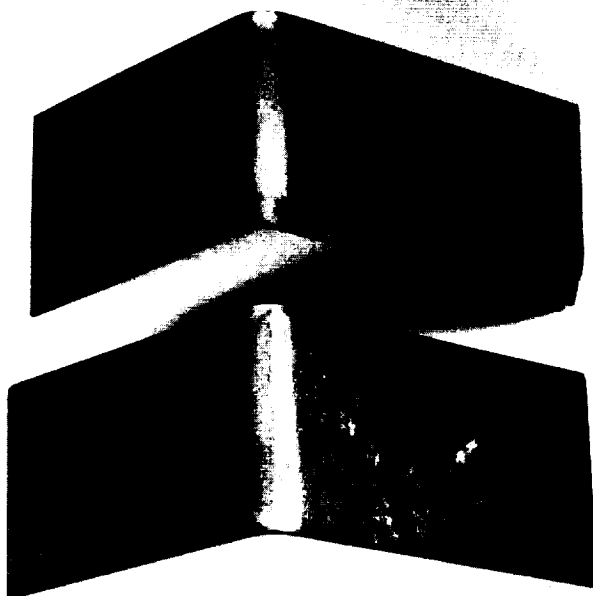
MINIMUM RADIUS (4t) BEND - 0.030-INCH MATERIAL - 1050°F.
